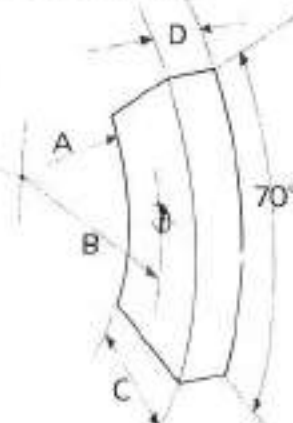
View showing thrust pad which can be fabricated locally and used to pull wheel axle shaft from bearings, spacers and axle gear. Dimensions are indicated in legend.
